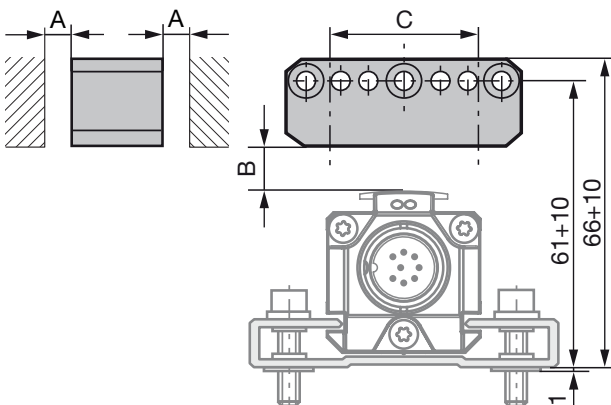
Dimensions and distances with BTL5-P-5500-2 magnet
